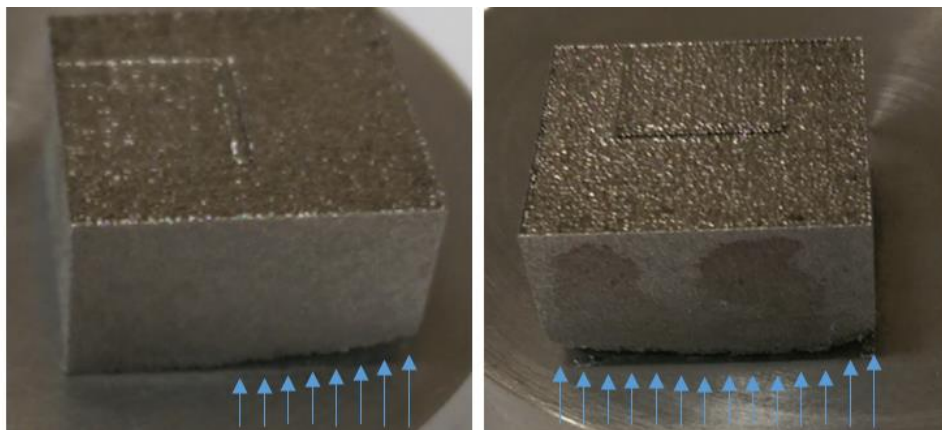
Photographs showing lifting of test piece P4 from the baseplate - a) right hand wall and b) rear wall – indicated with blue arrows.
